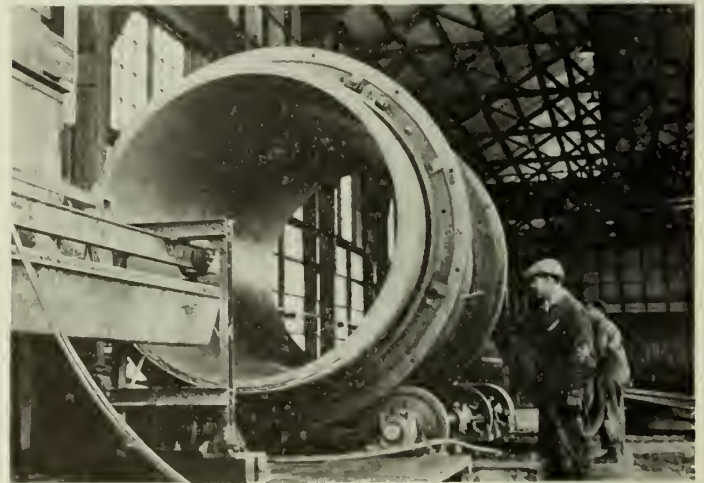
Fabrication of Steel Cylinder Reinforced Concrete Pipe.
